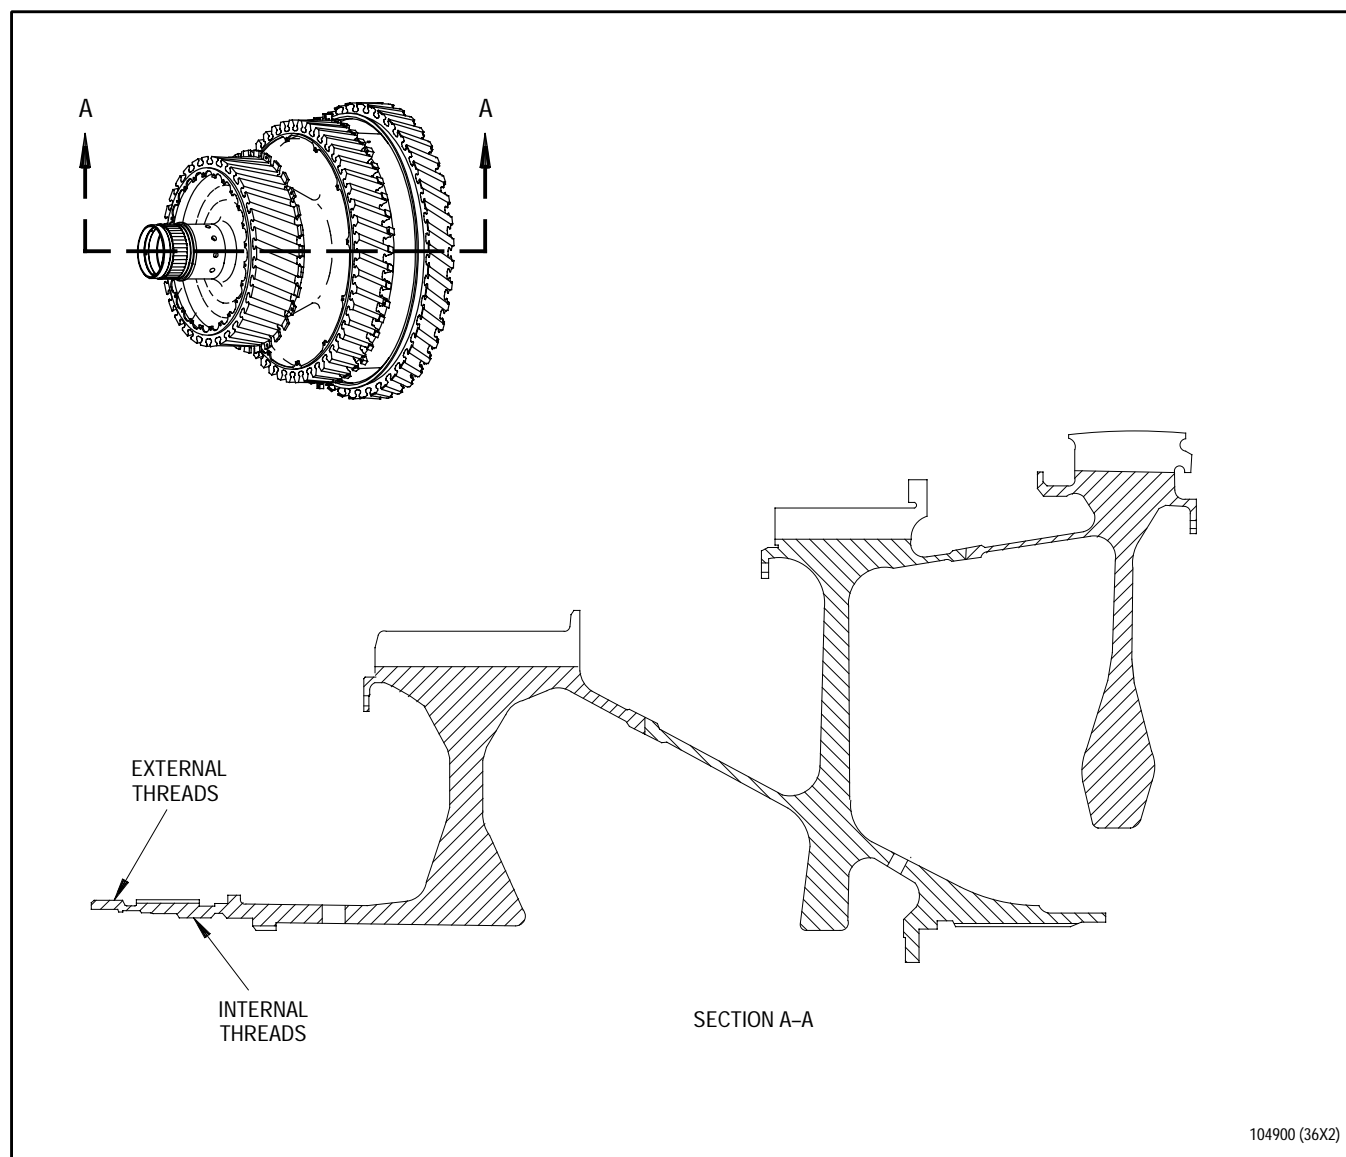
Front Compressor Drum Rotor Disk Assembly - Nut Thread Repair
